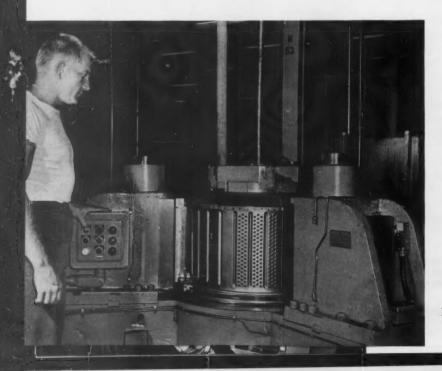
A total of 1593 holes, 7/32 inch in diameter, are pierced and embossed in the spinner basket on this specially designed hydraulically operated machine.
